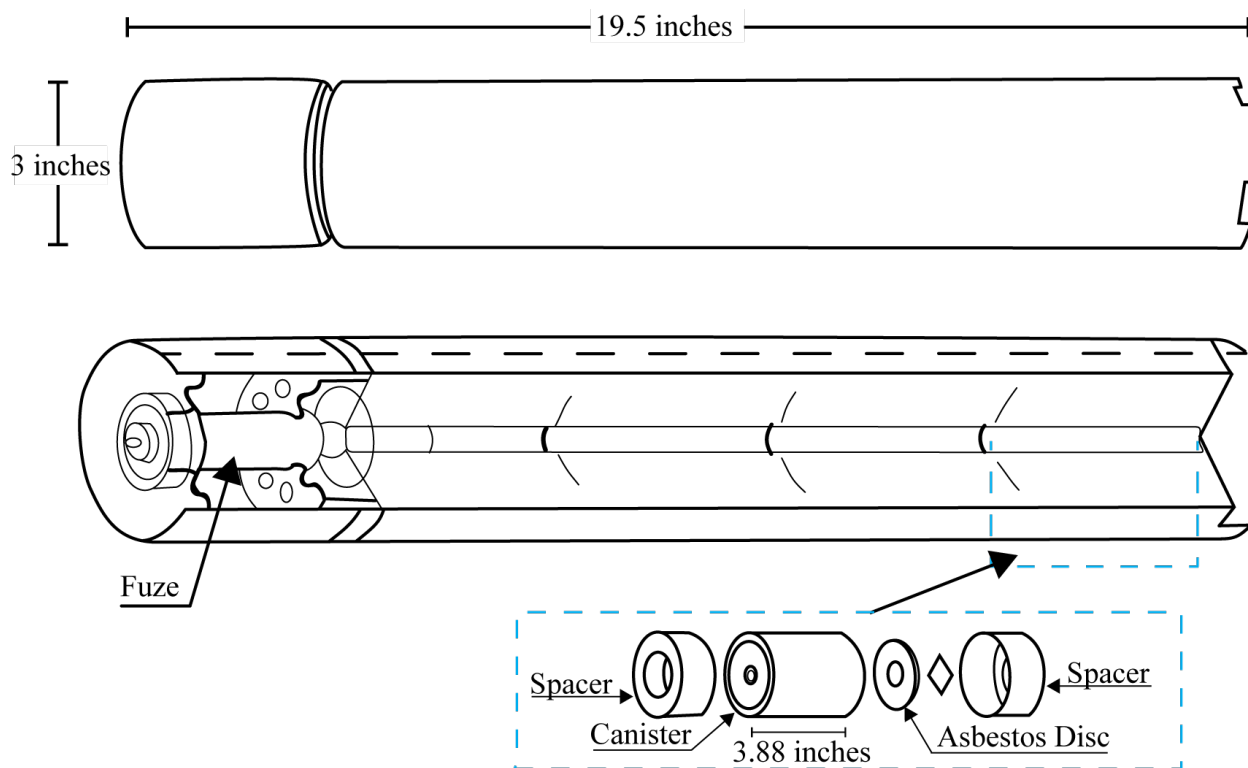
Bomblet, 10-pound, M138 – Line Drawing
